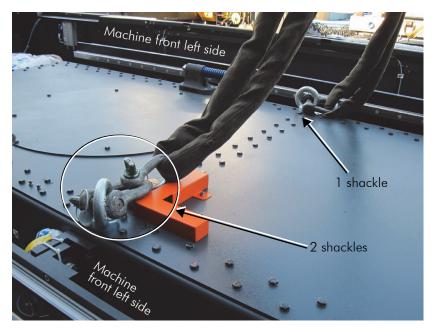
Lifting the Unpacked Machine with Crane and Accessories, Using Four Eyebolts
